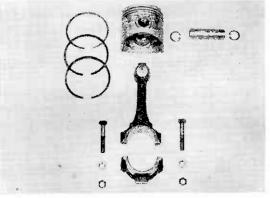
Component Parts of Piston and Connecting Rod Assembly
